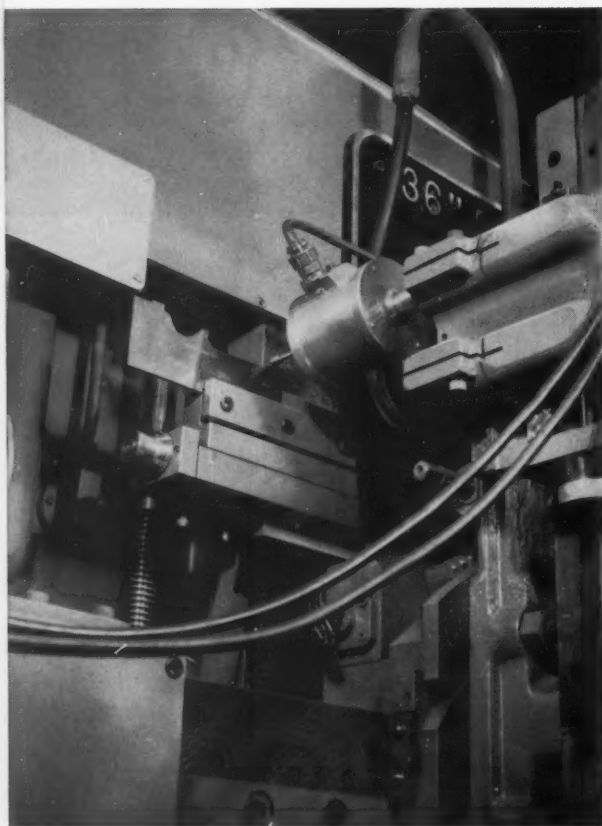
Close-up view of the vertical turret lathe seen in the heading illustration. Main head is at top center, and side head may be seen at the right.
